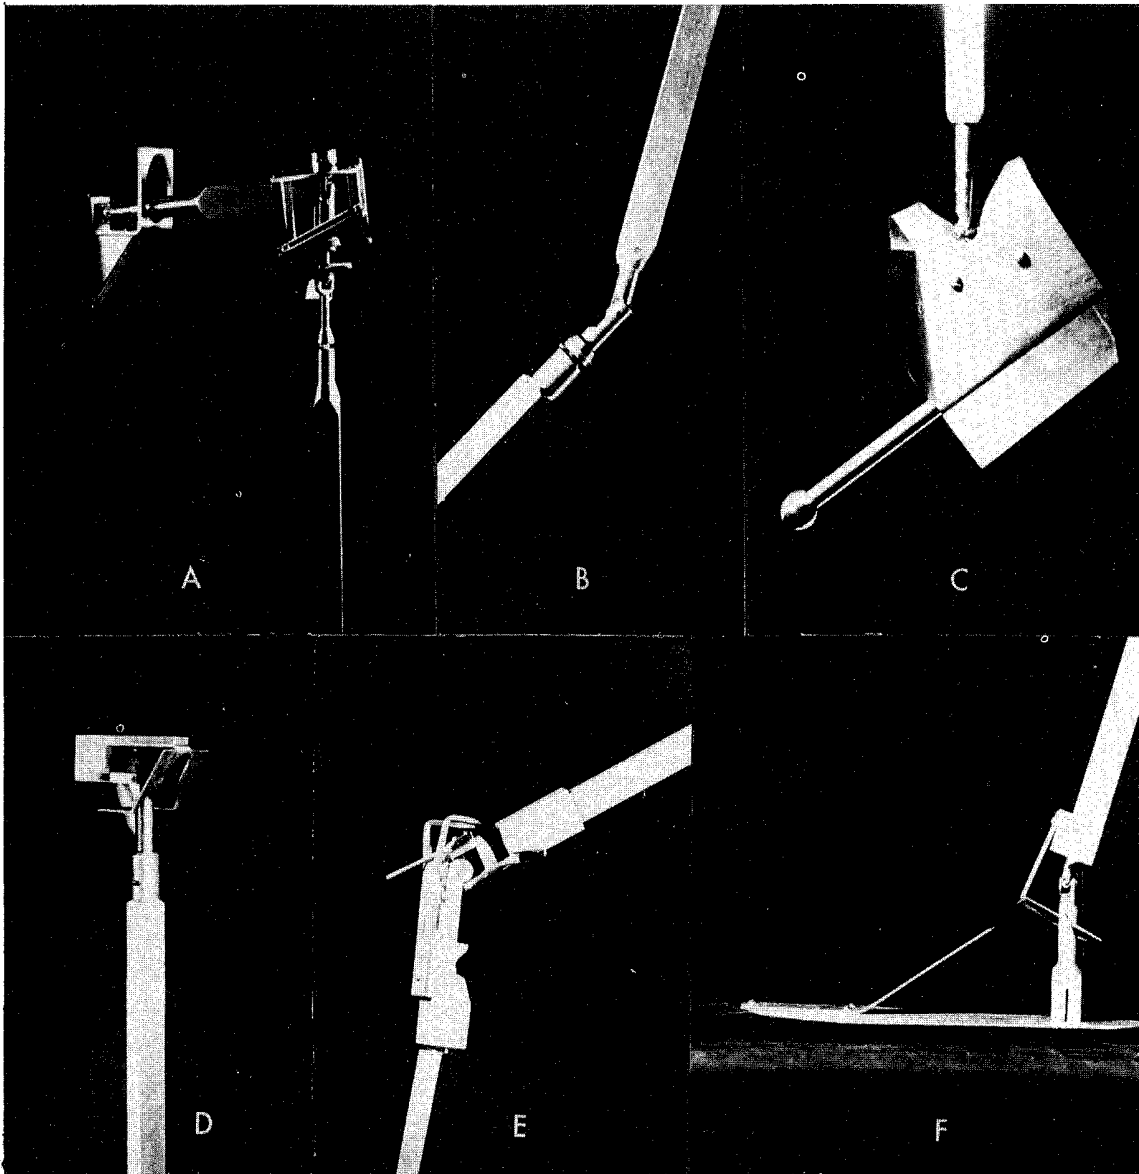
Photographs of machined joints of the upper and lower limbs. A-sternoclavicular, claviscapular, and glenohumeral joints. B-elbow hinge and forearm sleeve joints. C-wrist universal joint with hand shape and grip axis. D-universal and sleeve joint of hip assembly. E-knee joint. F-ankle universal and foot assembly.
